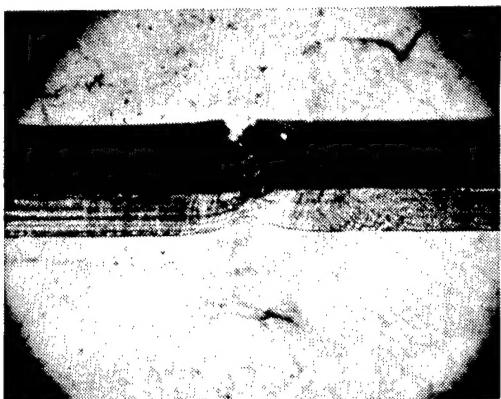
Tensile specimen showing the weld break at the root of the step joint. Note the localized neck-down in the weld area.
